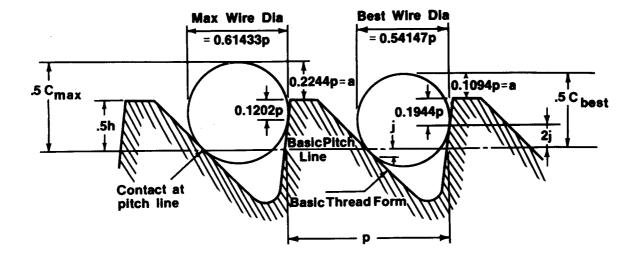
DIAMETERS OF "BEST" AND "MAXIMUM" THREAD WIRES FOR BUTTRESS SCREW THREADS
